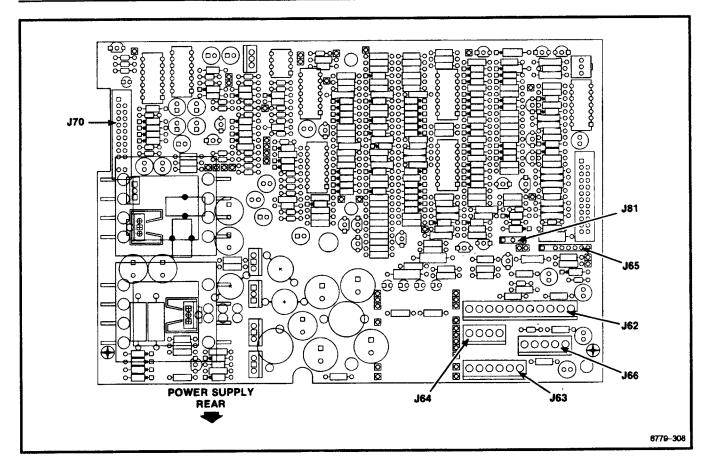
Bottom view of the A2A2 Control Rectifier board showing connector locations.
